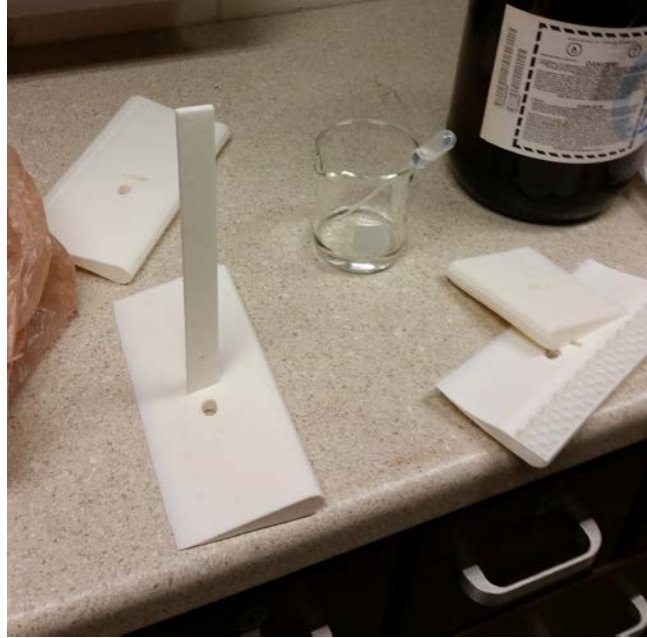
Welding Plastic Pieces Together with Acetone
